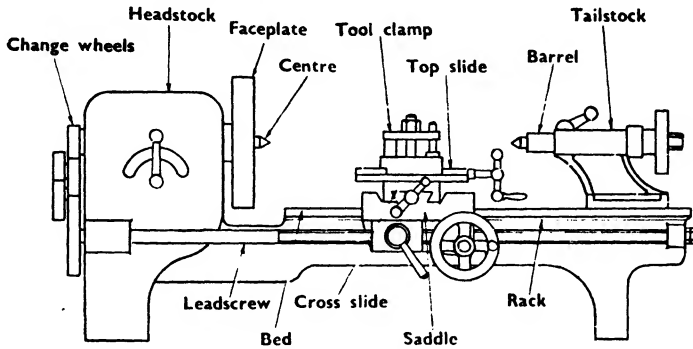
PRINCIPAL FEATURES OF THE LATHE
